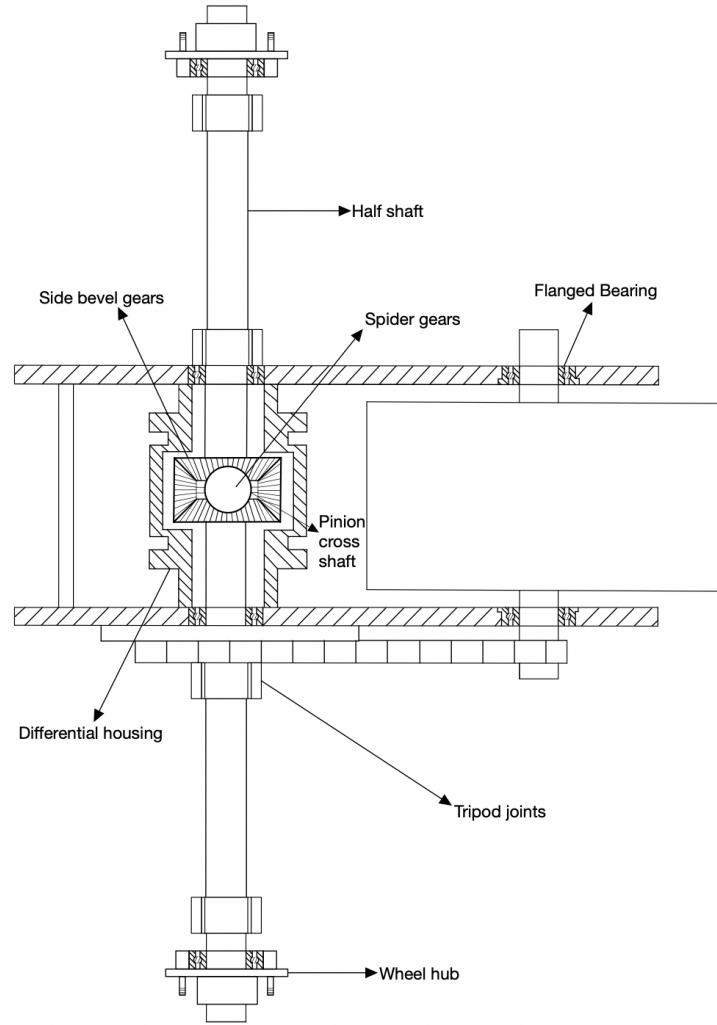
Top View of the Out-Wheel Motor with Chain and Sprocket Configuration [4] [5]
